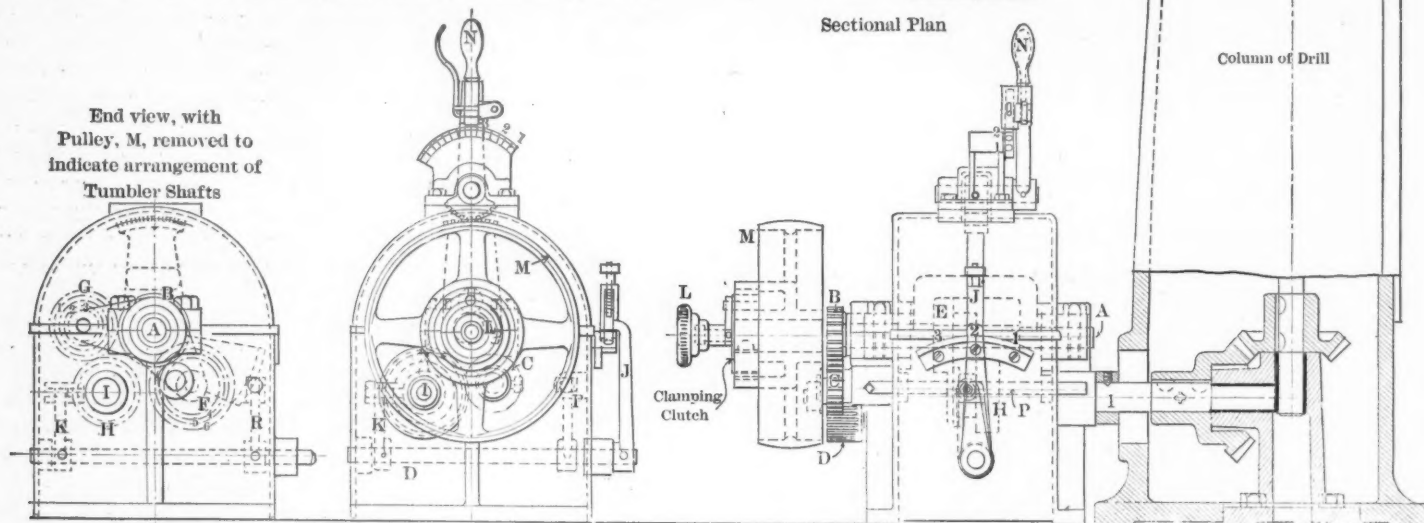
DETAIL DRAWINGS OF THE VARIABLE-SPEED DRIVING MECHANISM UPON THE FOSDICK RADIAL DRILL.
